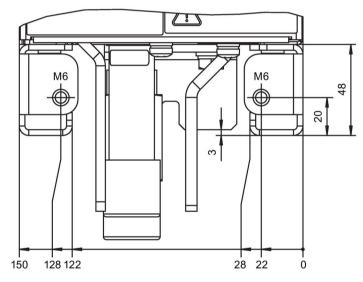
Rail profile, Active Line Module and Motor Module, frame size GXL, (dimensions in mm)
